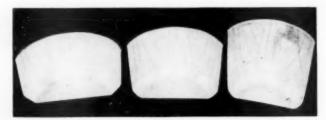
Three drawn, circular shells illustrating the flow of metal during drawing operation. Photo by courtesy of Aluminum Company of America.
